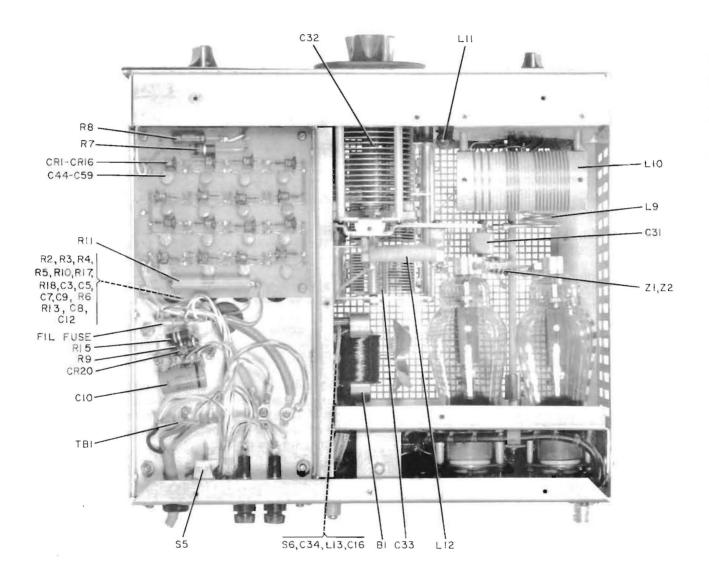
R-F and Power Supply Compartments, Parts Location
